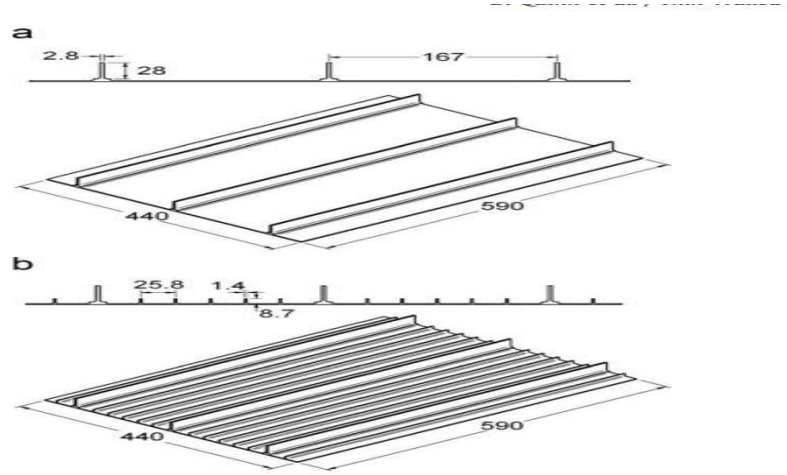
Test specimen geometry. (a) Specimen A; (b) Specimen B.
